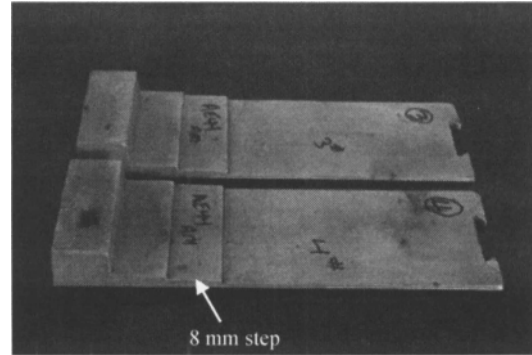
AE44 step-plates produced by sand-casting. Specimens were cut from the 8 mm thick step.
